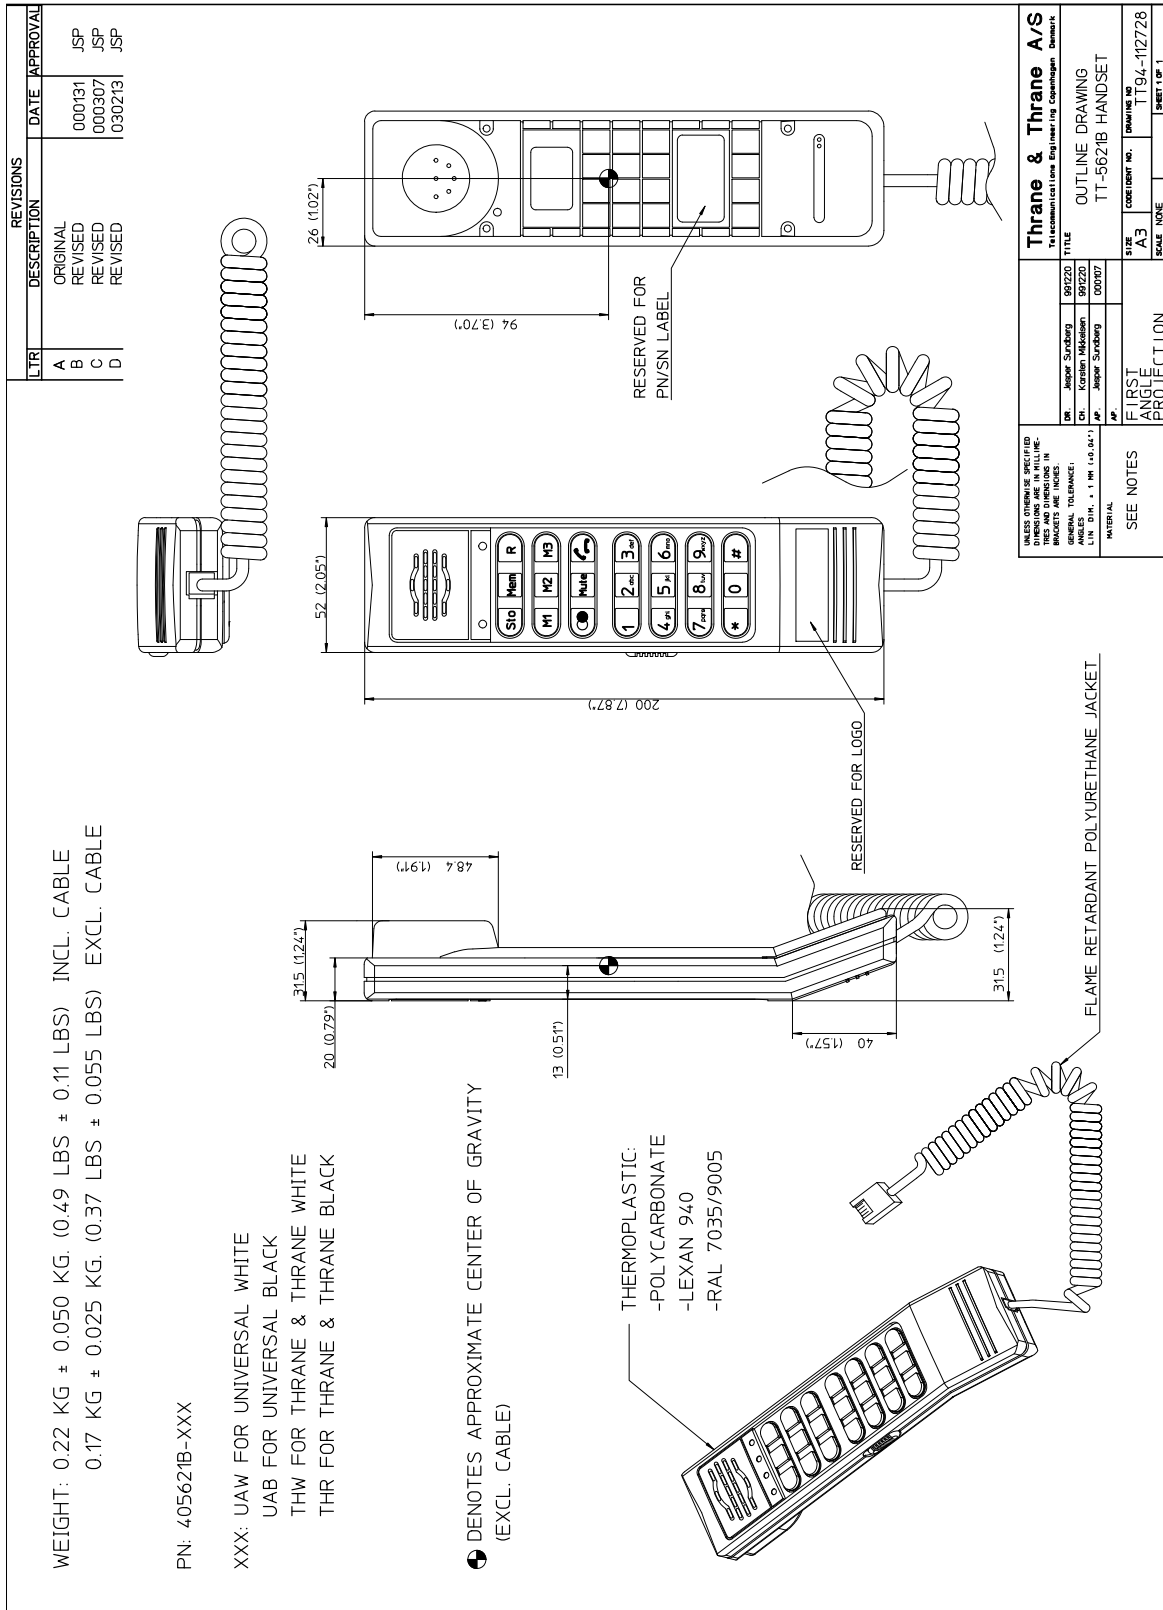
Outline drawing: TT-5621B 2-Wire Handset
